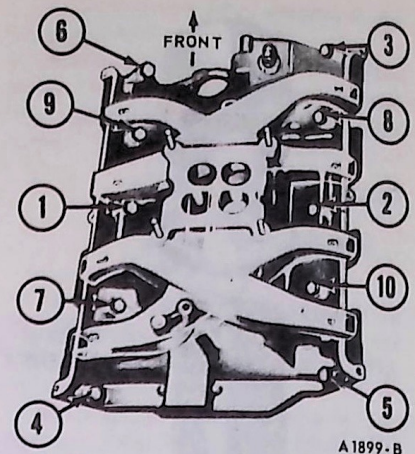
Intake Manifold Torque Sequence—330,360,361,390, and 391 Engines
